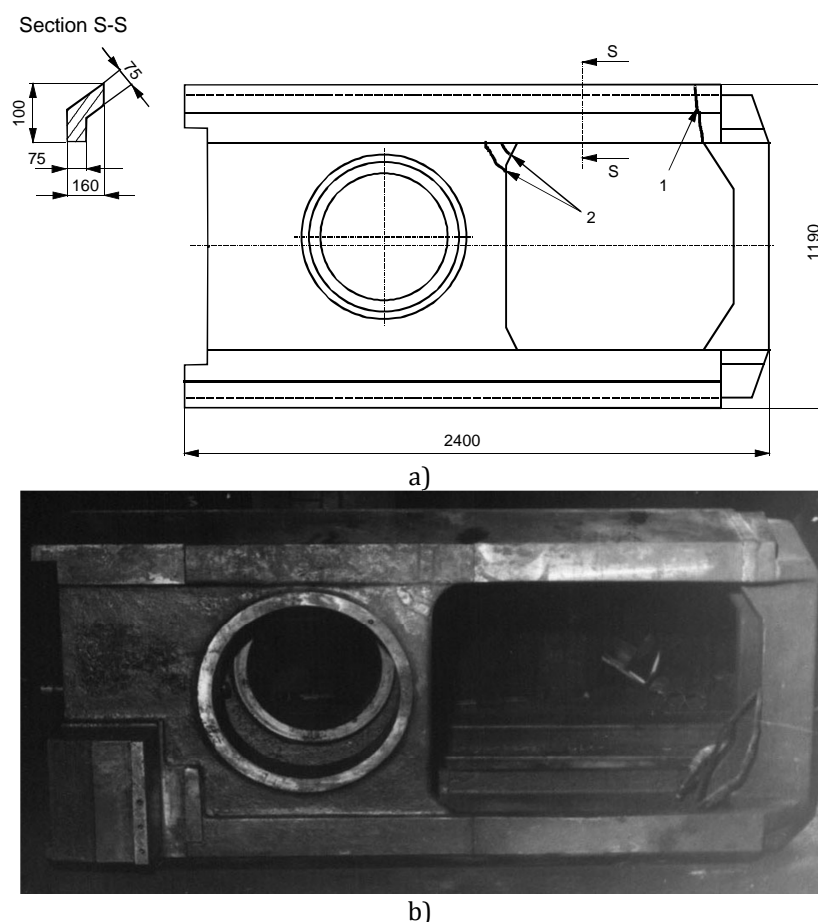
Frame of vertical forging press: a) sketch of frame (1 - place the fracture and 2 - observed cracks) and b- regenerated, machined and heat treated part.
